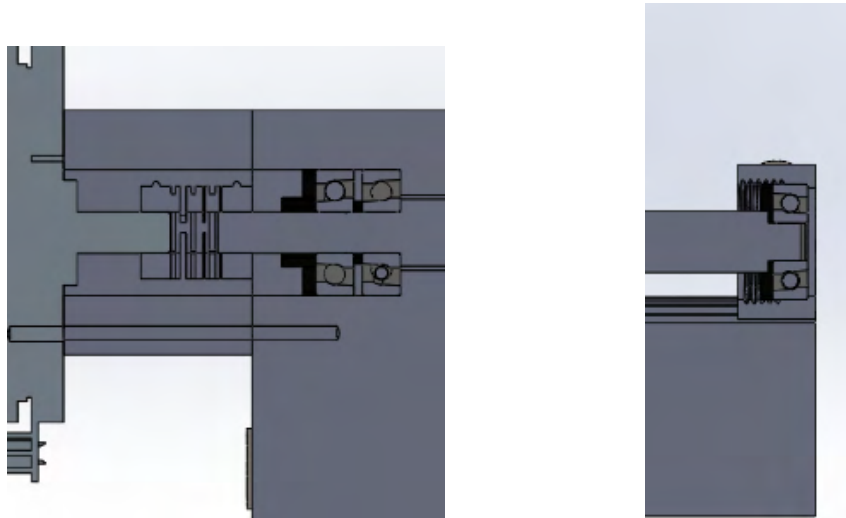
Zoomed in cross sectional view of bearing arrangement
